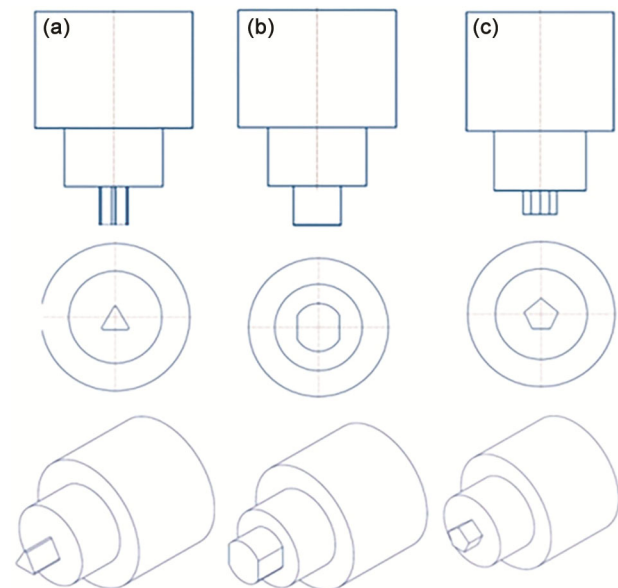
Friction stir welding pin profiles to perform the friction stir welding on similar AA 2014 aluminum alloys sample a) triangular pin, b) pedal pin, and c) pentagonal pin.
